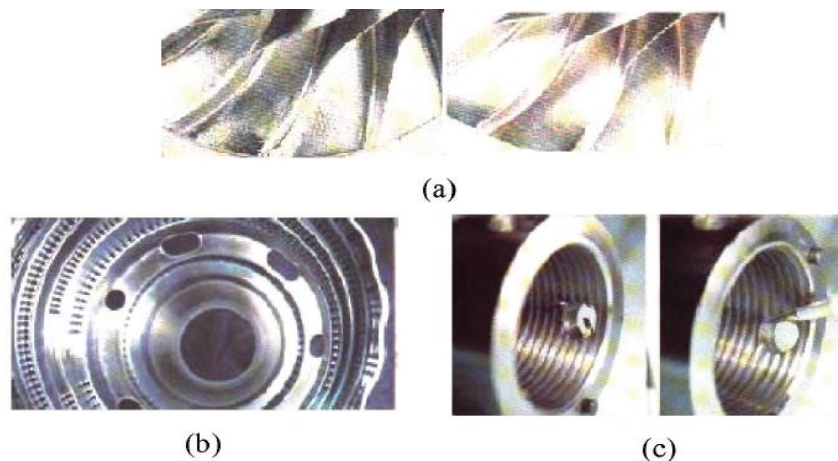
(a) Surface finish of cast blades, (b) deburring of cooling holes in turbine blades, (c) finishing of intersections
